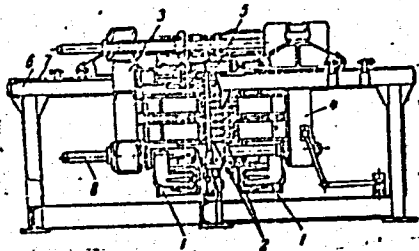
1 - welding transformers; 2 - welding guns; 3 and 4 - vertical plates; 5 - driving mechanism for plates; 6 - frame; 7 - guides; 8 - rods
